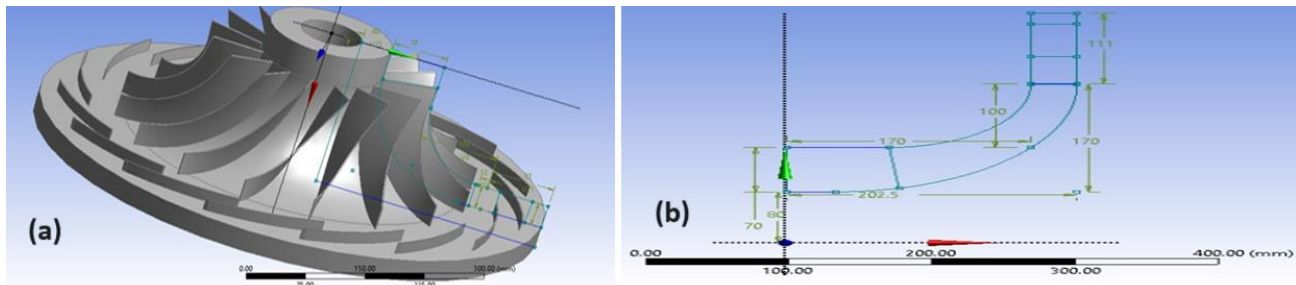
(a) Centrifugal compressor stage; (b) Geometric dimensional details [1].
